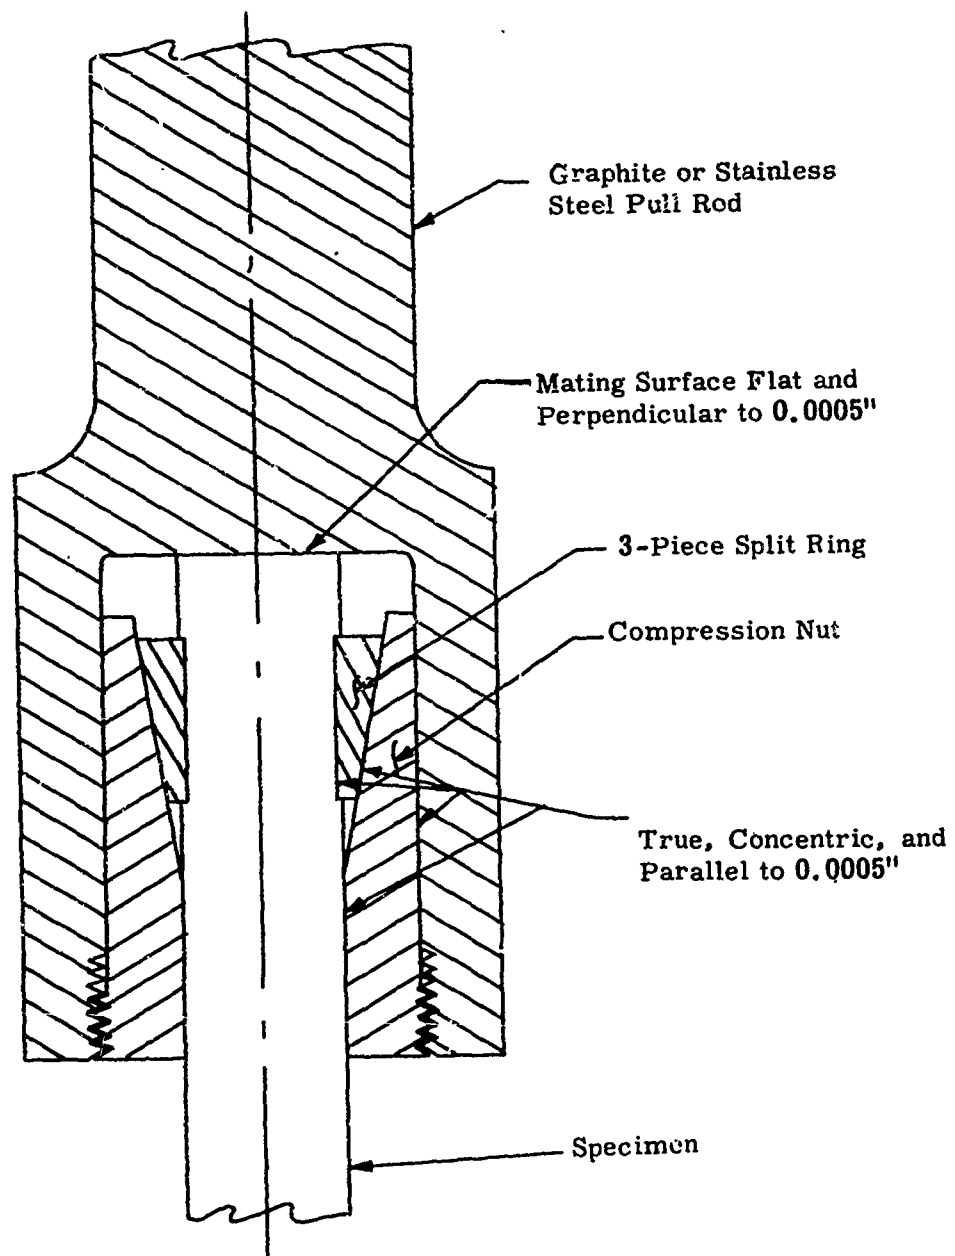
Precision Collet Grip for Tensile Specimens 2:1 Scale
